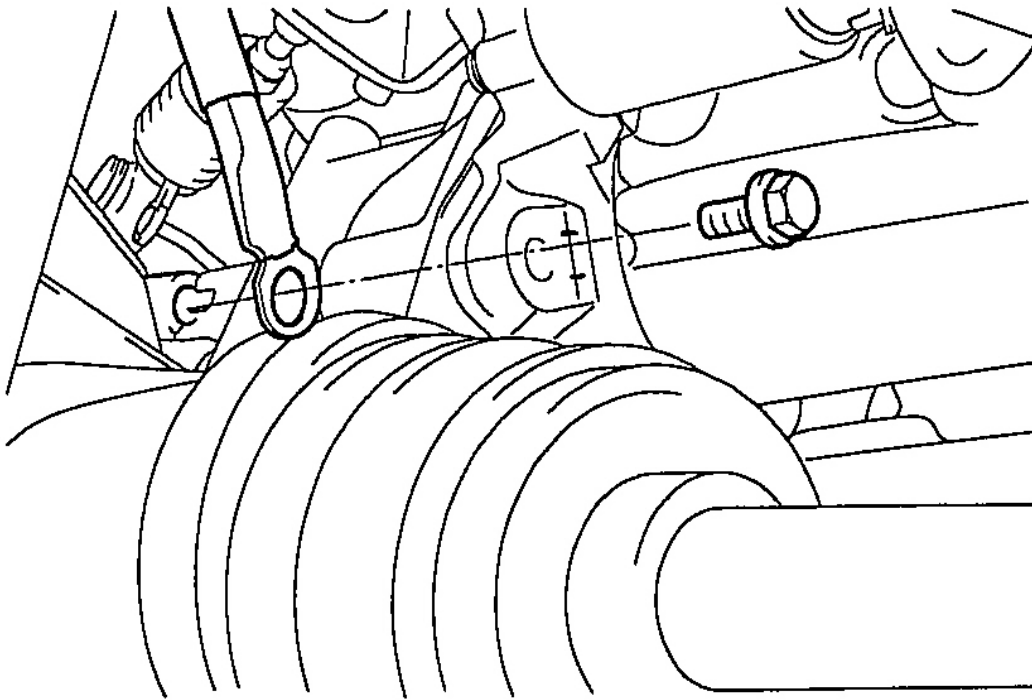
Disconnecting Air Conditioner Compressor From Mounting Bracket
